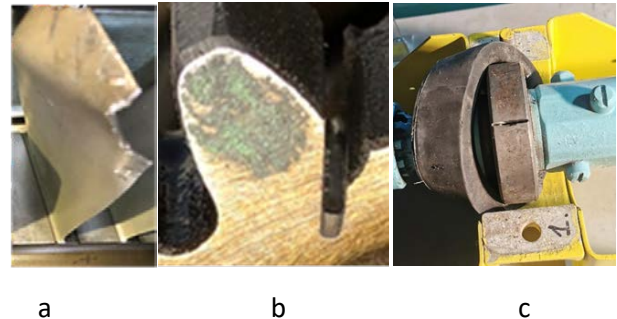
Seeded faults of drive train bearing (a), compressor blade (b) and gear tooth (c).
